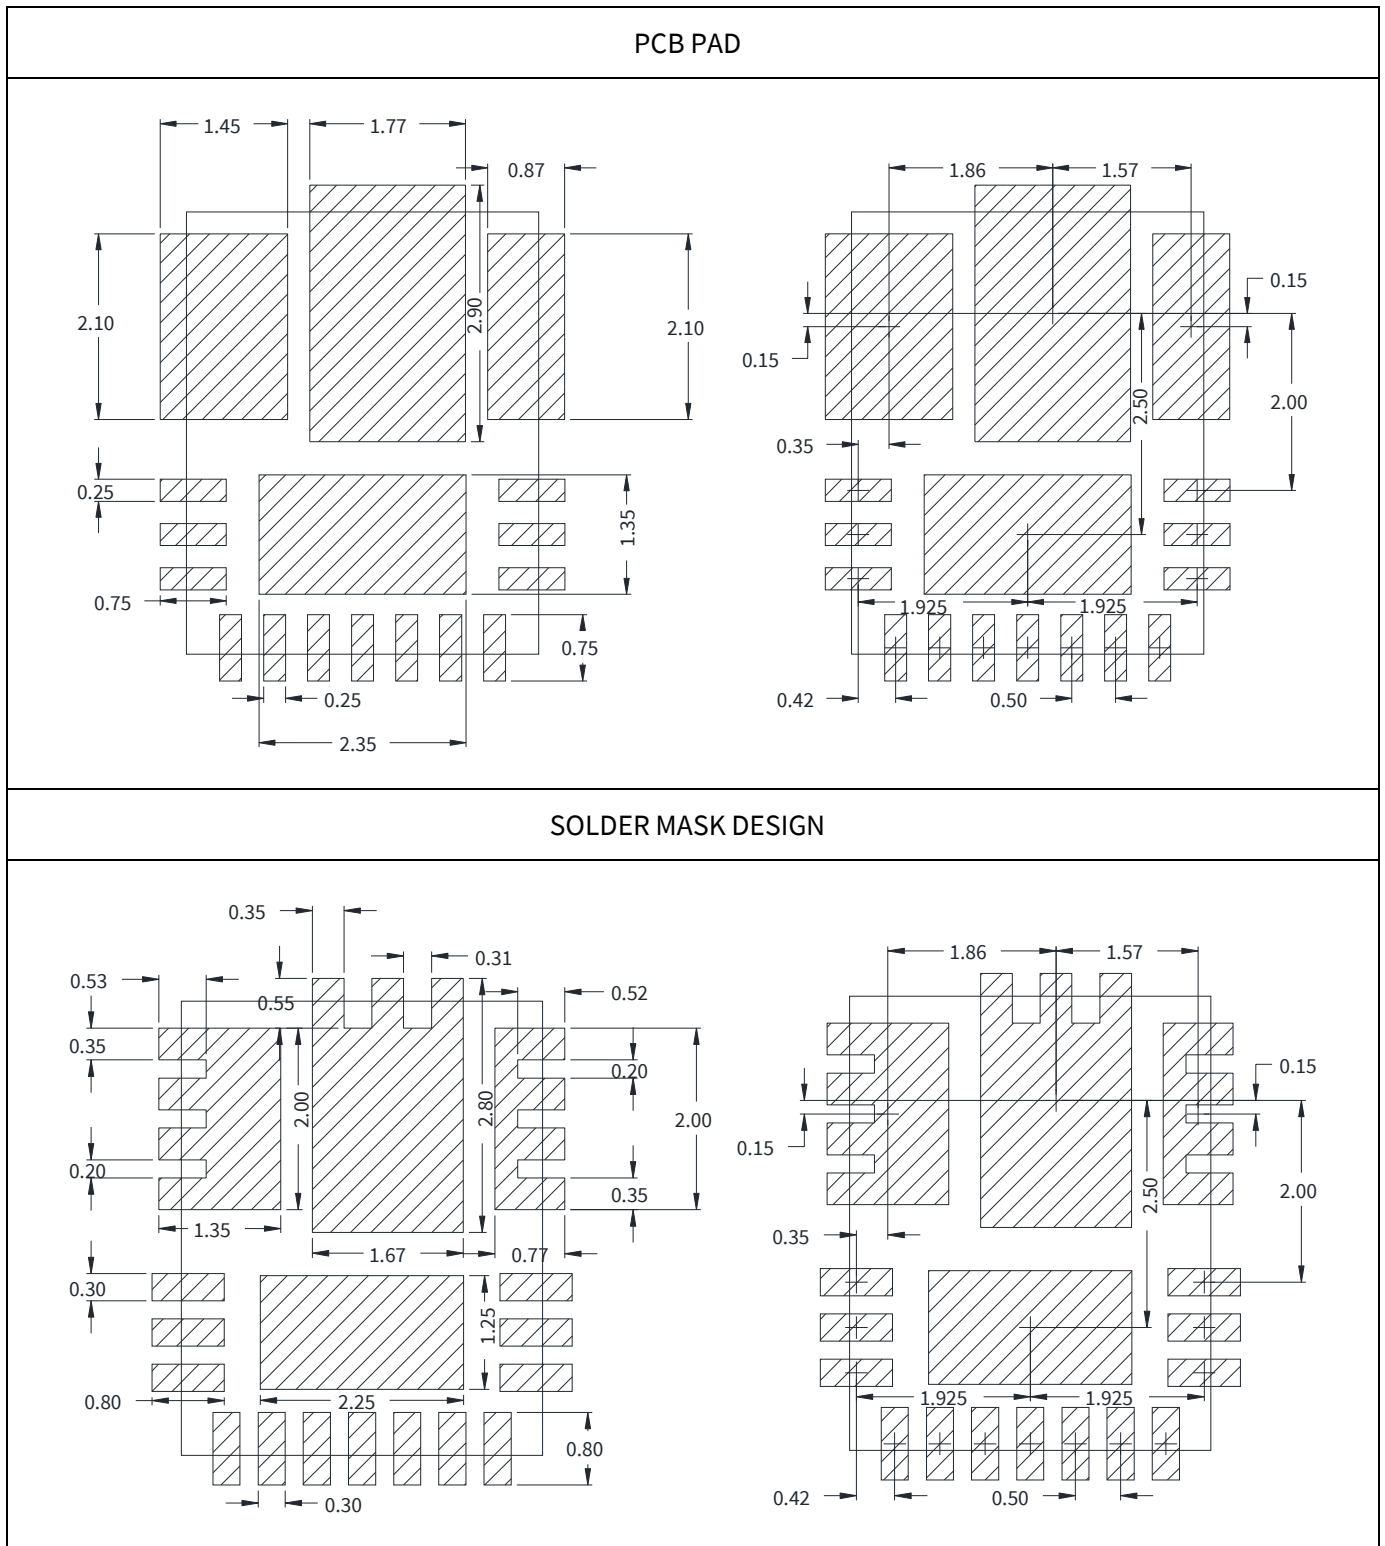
PCB Metal and Solder mask (all dimensions in mm)
